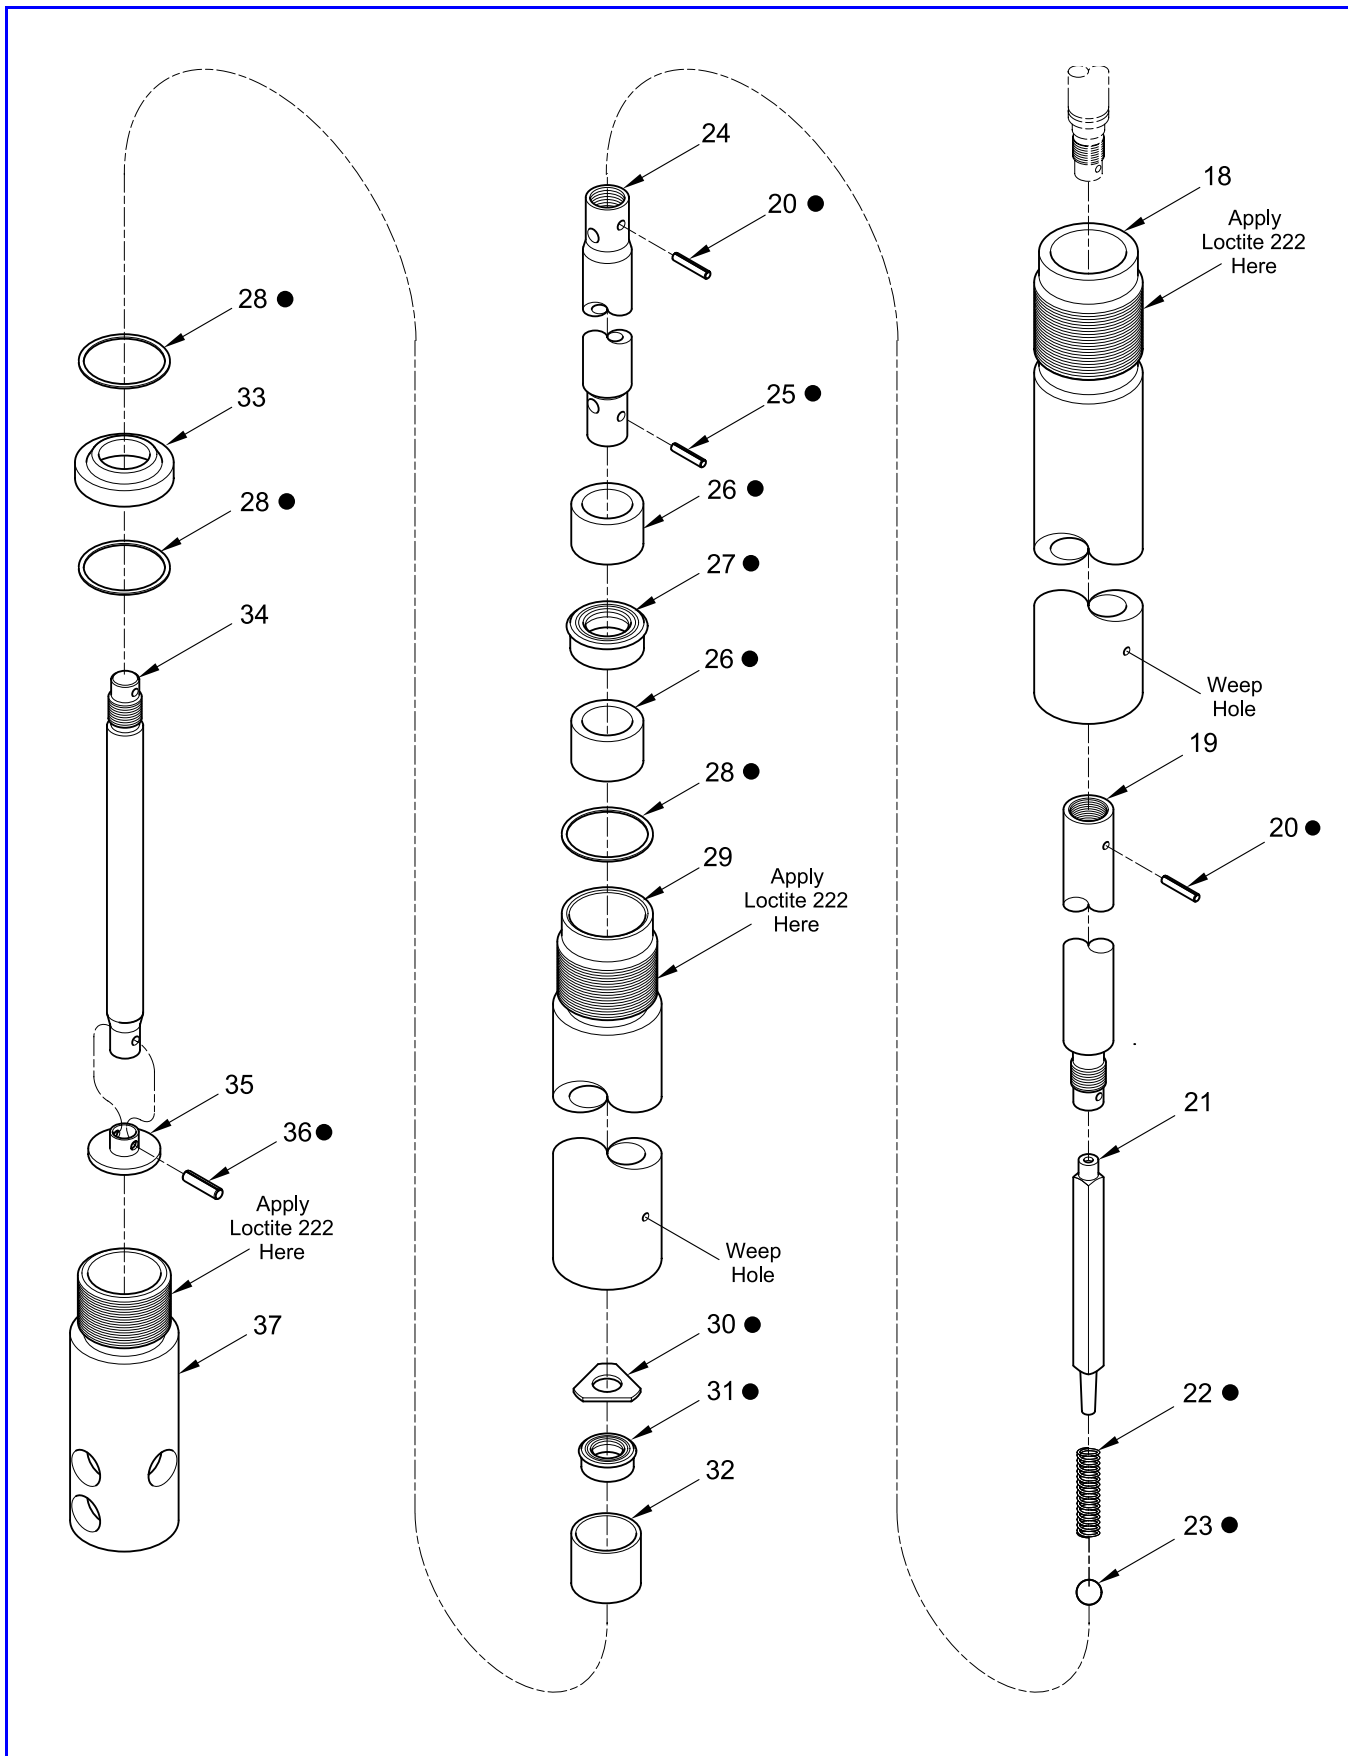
B High-Pressure Grease Pump Model 9911-1 and 9950-1 - Exploded View (Sheet 2 of 2)
